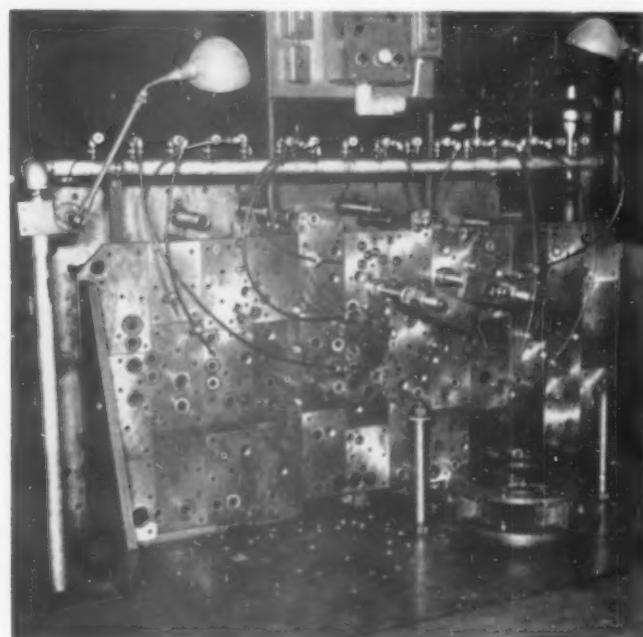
Shown here in close-up are removable button locators and coolant tube holding magnets.
